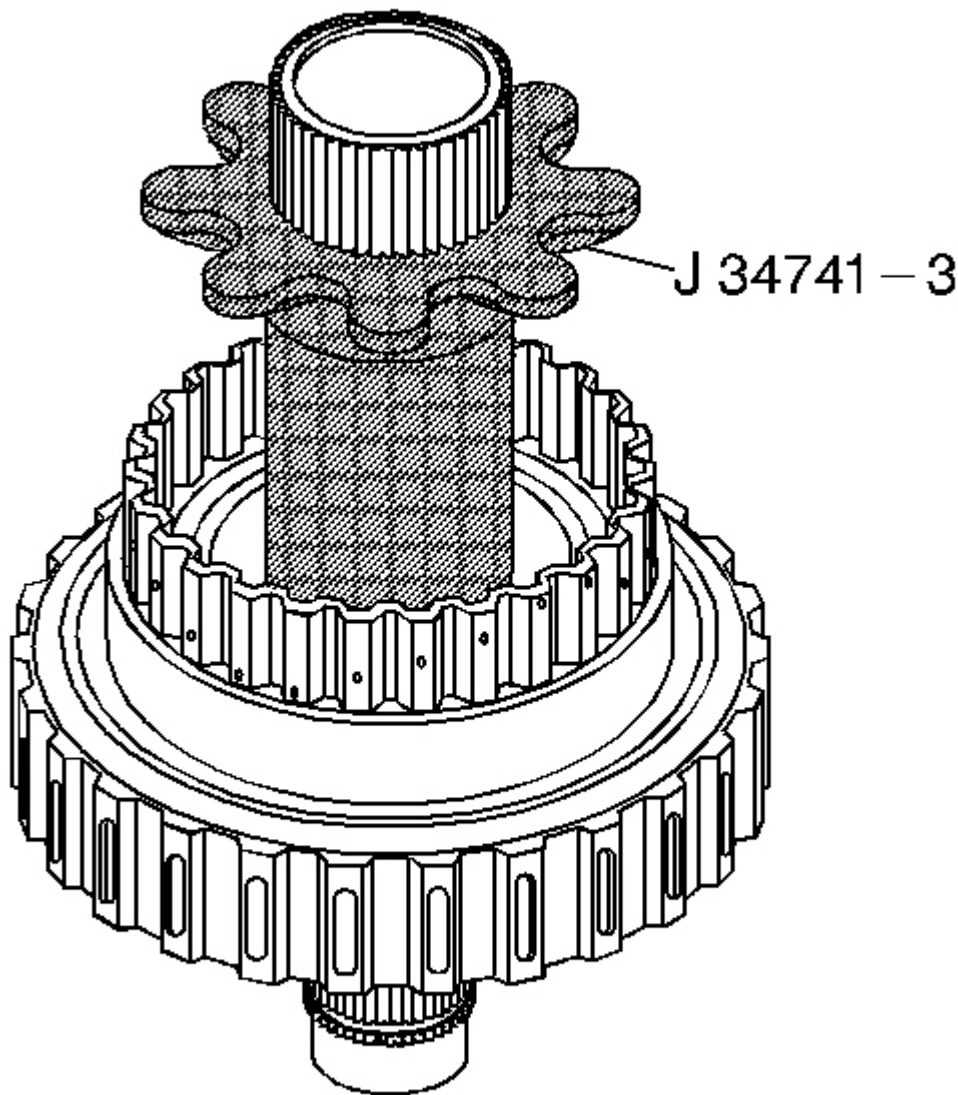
Sizing The Oil Seal Rings Using J 34741-3
